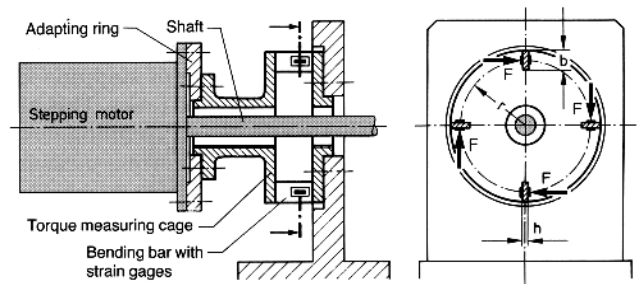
Measuring cage between motor and bench measures reaction torque produced by rotor on stator
